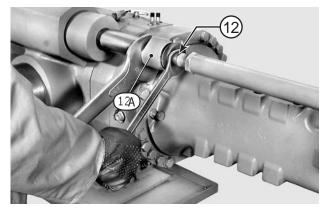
Hold joints (12A) tight and rotate the ball pins (12) until tools T2 (See drawing T2 p. 45) become parallel to each other.
